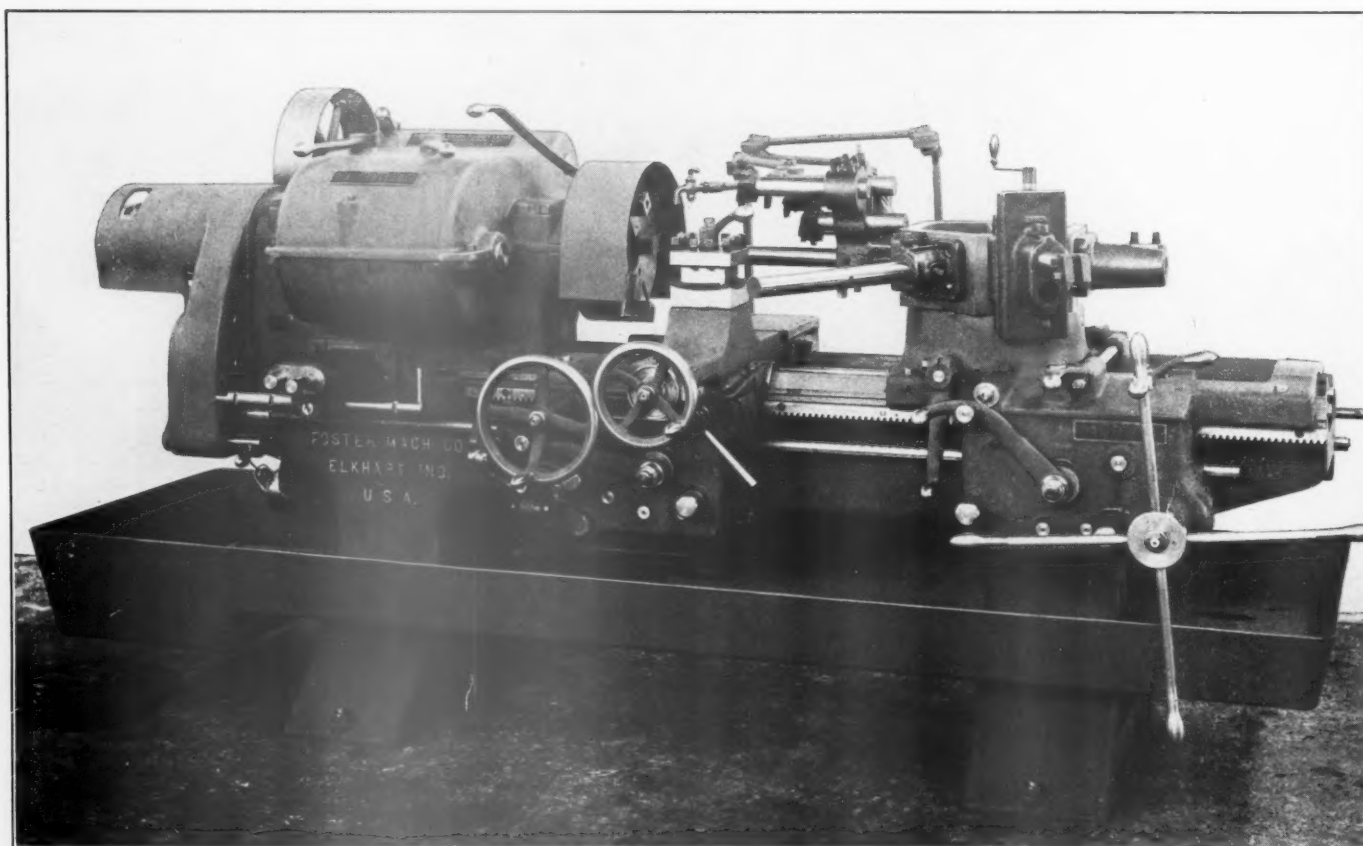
Foster 2-B Universal Turret Lathe with Chucking Equipment
